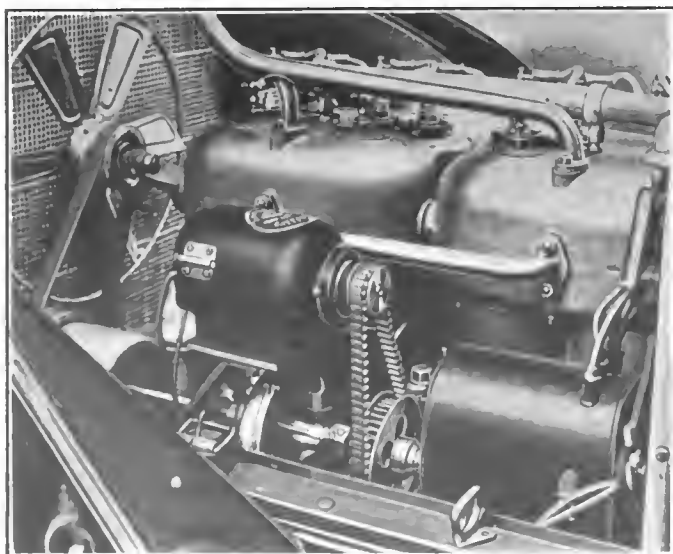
Lighting dynamo driven by a silent chain taking power from a pinion which is fastened to the shaft which drives the magneto
